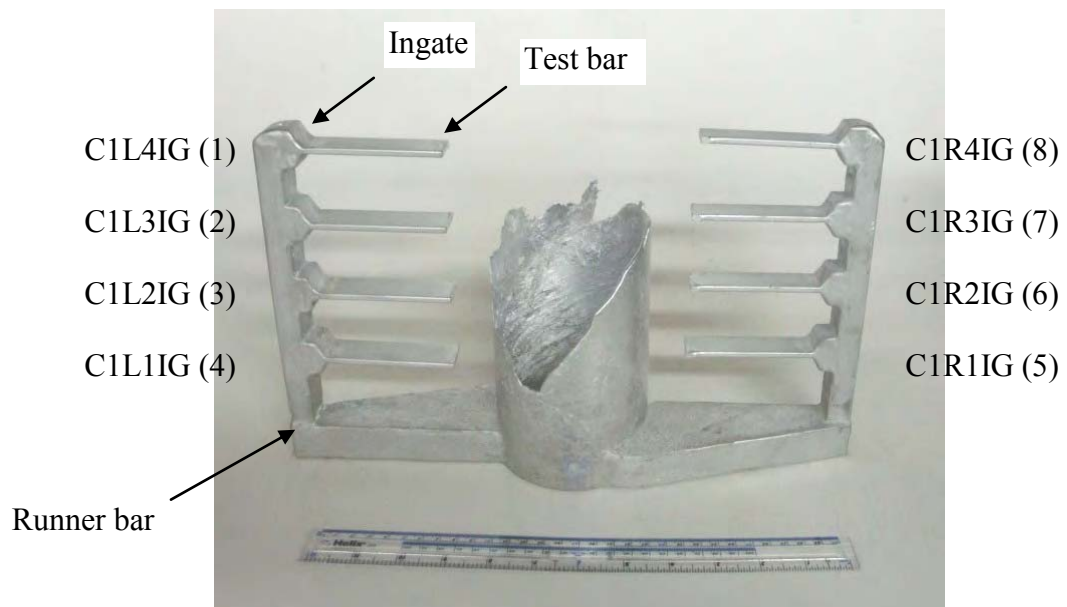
2. Experimental casting of indirect gating mould design. The test bars were identified according to the code shown.
